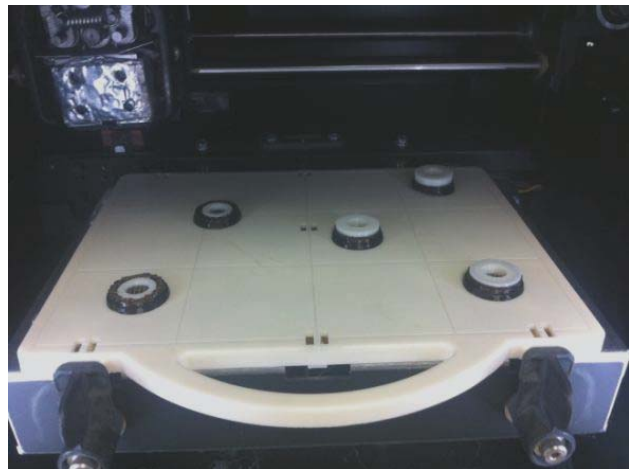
Five RP parts were built in the modeling platform fabricated after sandblasting
